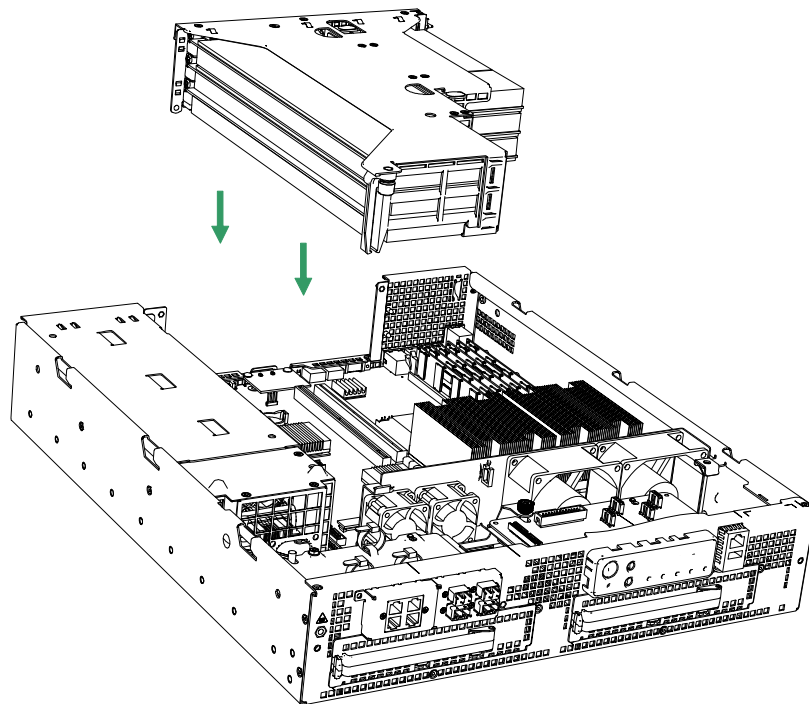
PCI Adapter Subsystem Assembly and Installation (B)
